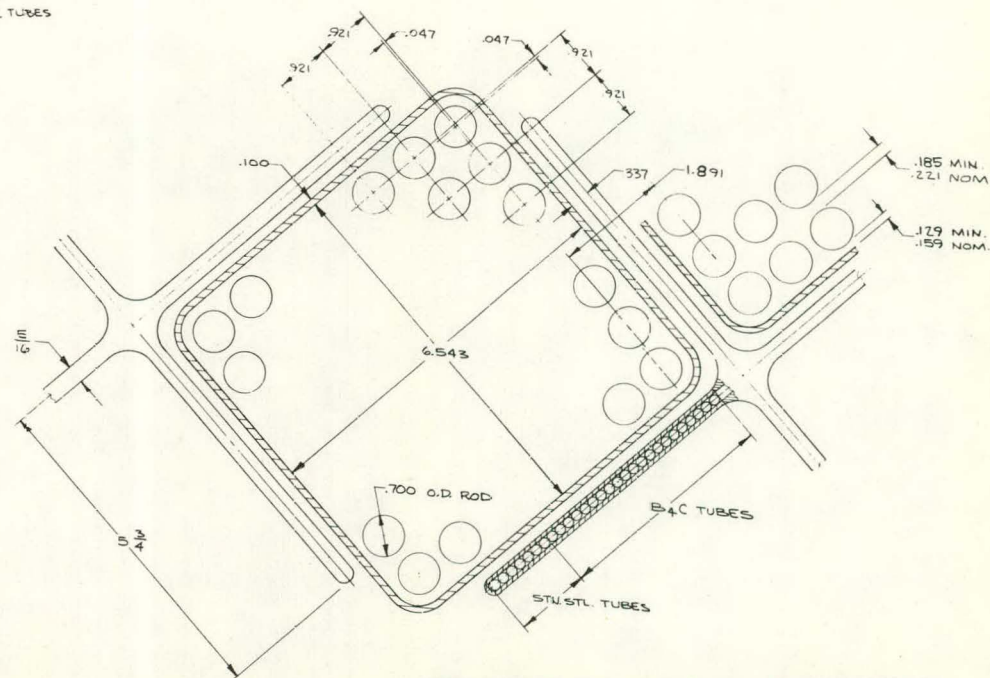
DRAWING OF 7 x 7 FUEL ASSEMBLY
